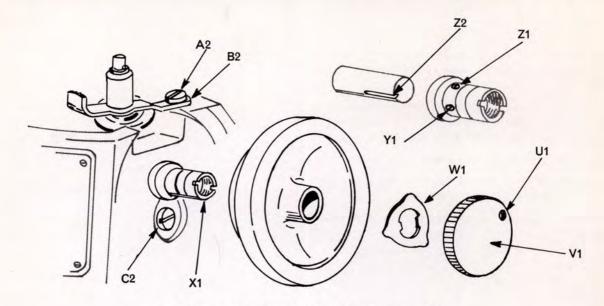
Hand Weel and Bobbin Winder Assembly.
